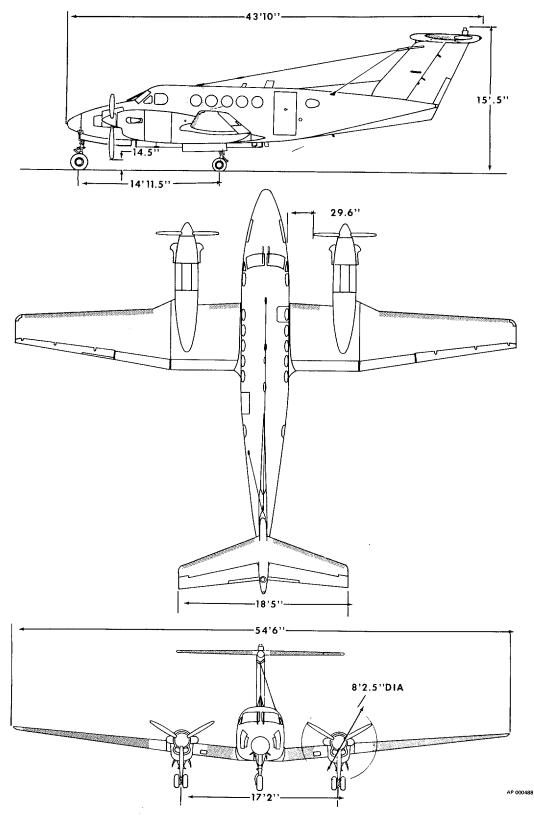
Principal Dimensions C-Sheet 1 of 2
